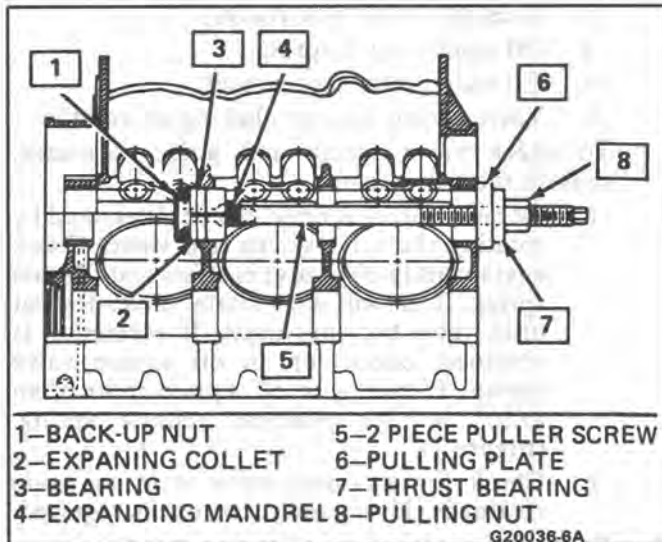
Removing/Installing Camshaft Bearings (Typical)
